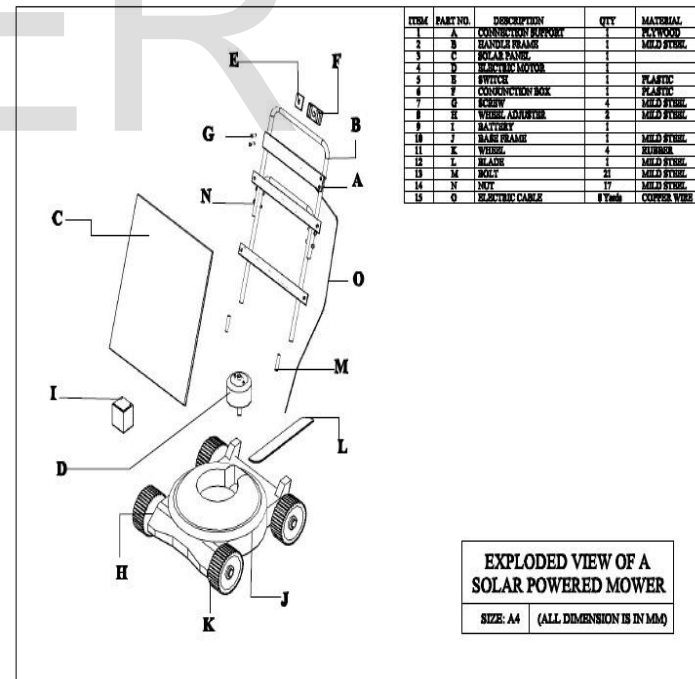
Exploded View of Solar Powered Lawn Mower
